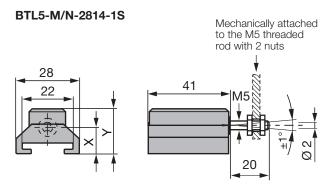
Installation dimensions of BTL5-M/N-2814-1S magnet
